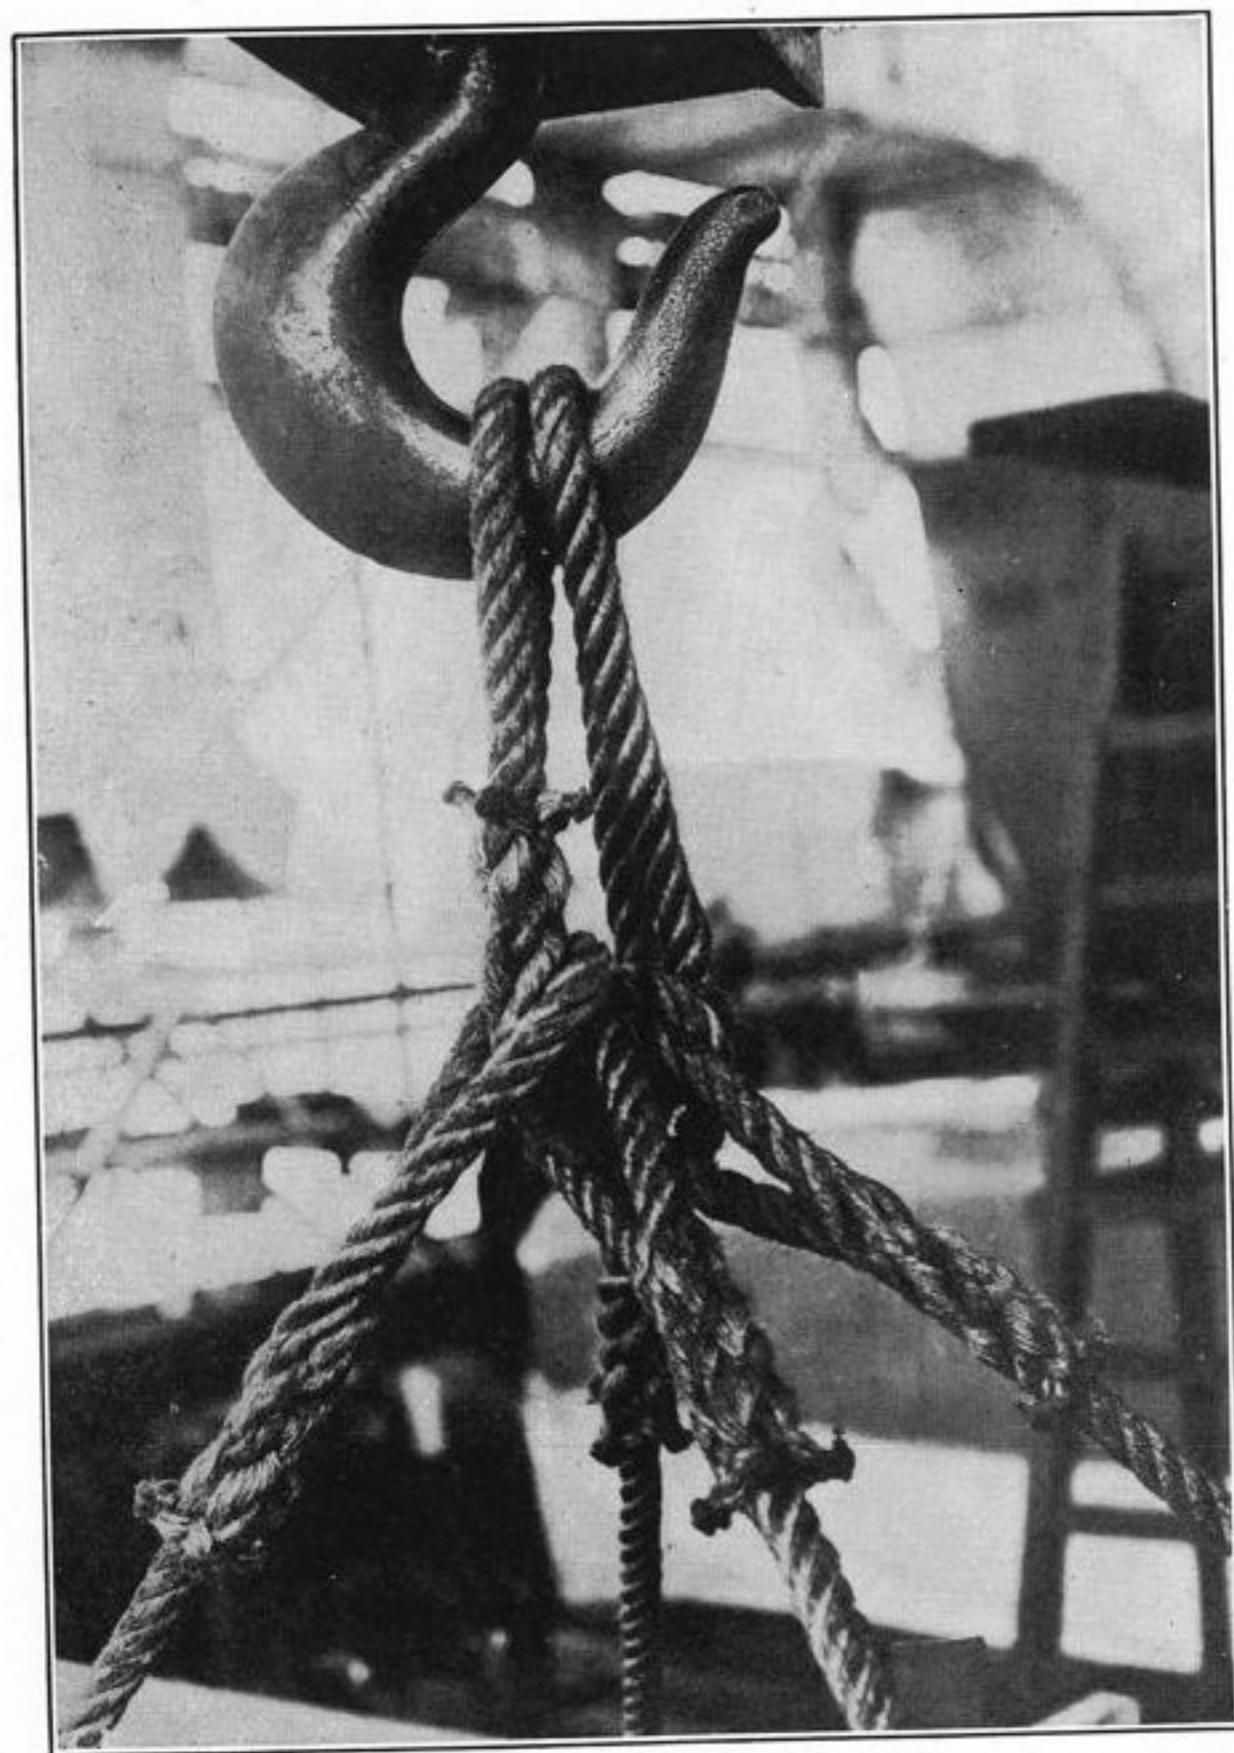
METHOD OF HOLDING THE FOUR ROPES FROM SIDE-WALK BEAMS TO CENTER LIFTING BLOCK.
